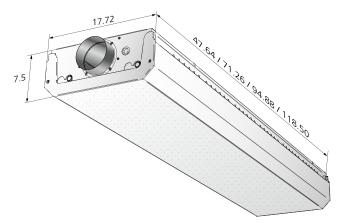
Dimensional drawing (in.) - ADRIATIC Prisma.
